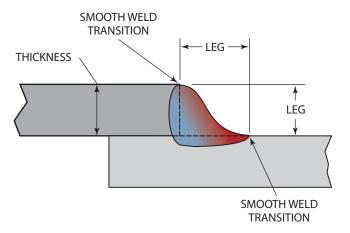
The legs of a fillet weld generally should be equal to the thickness of the base metal.
